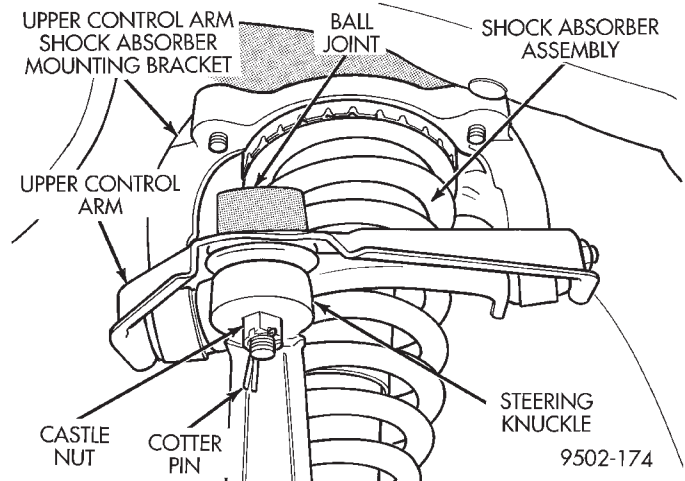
Upper Ball Joint Attachment To Steering Knuckle
